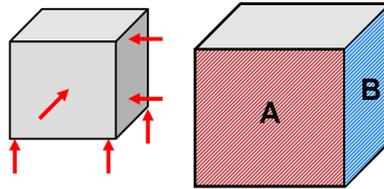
Locating scheme (to the left) and mating geometry (to the right)
